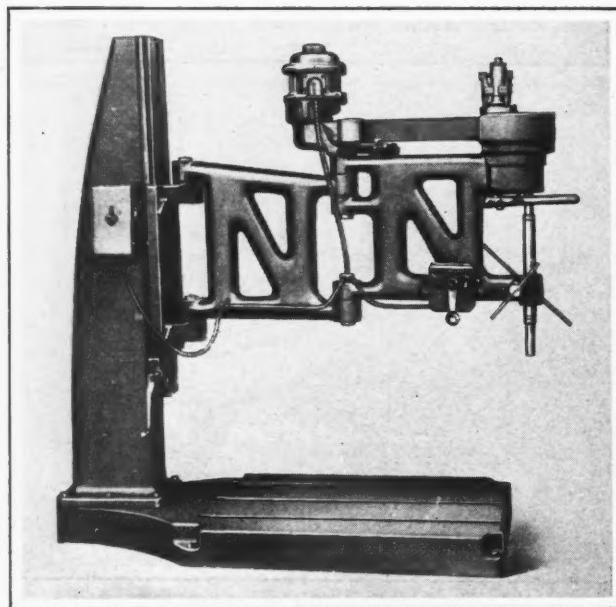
Hammond Radial Nut and Stud Driving Machine
